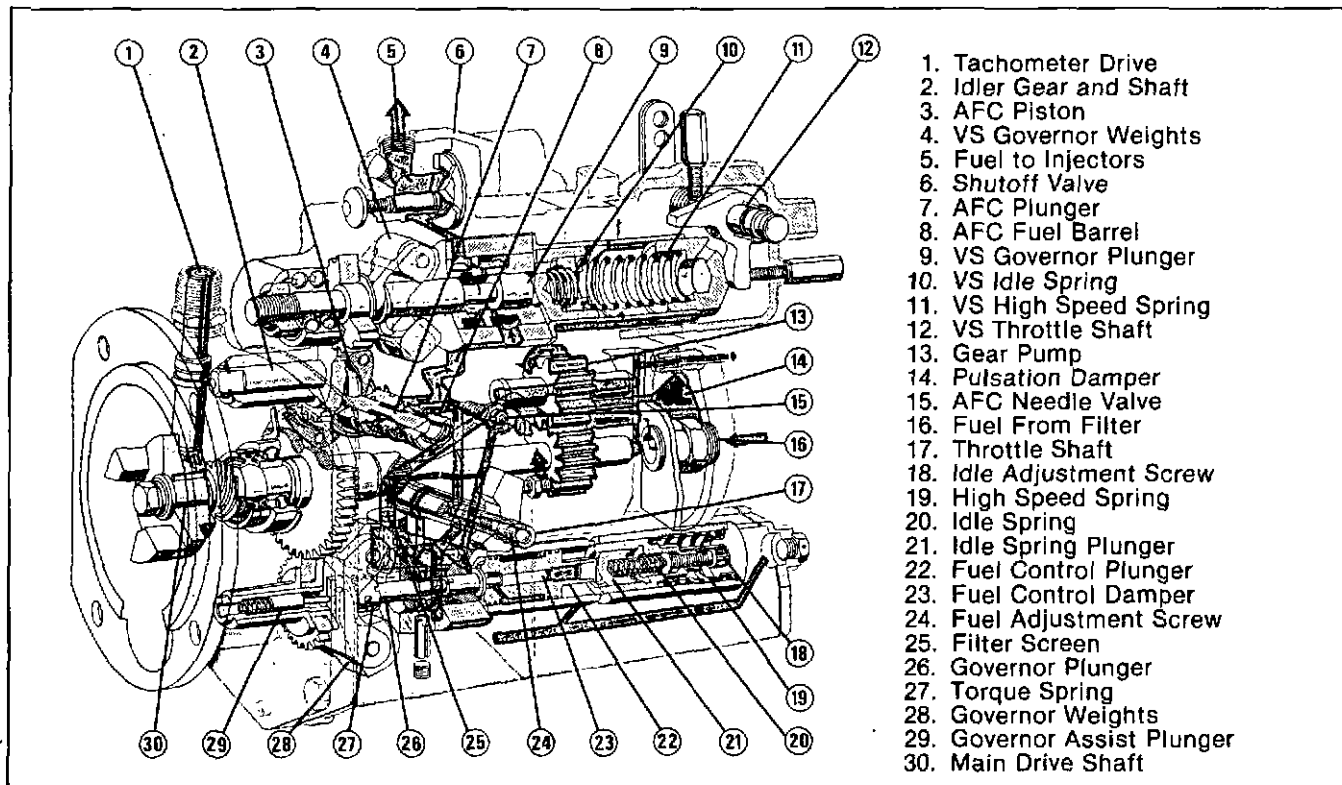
, (FWC-54). PT (type H) fuel pump cross-section.
